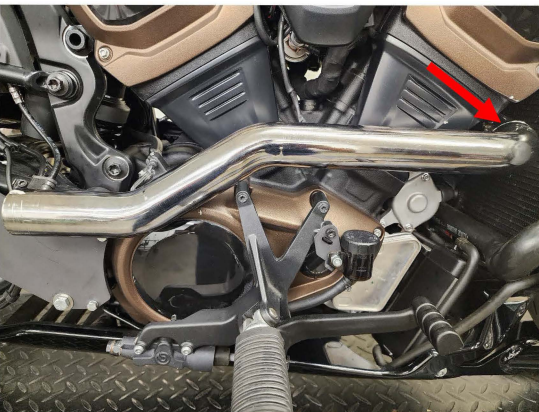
install front header pipe as shown make sure it is screwed on correctly.
